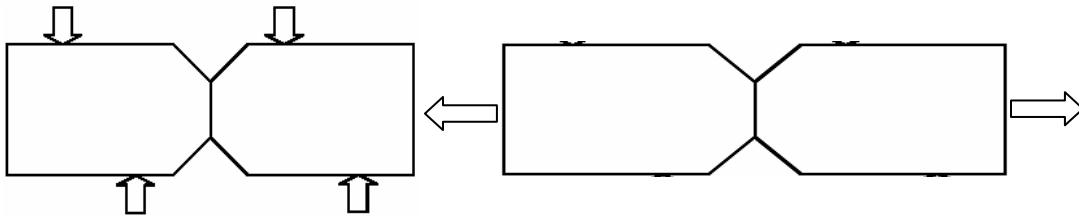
Iosipescu shear test (left) and Butt-joint tensile test (right) joints
